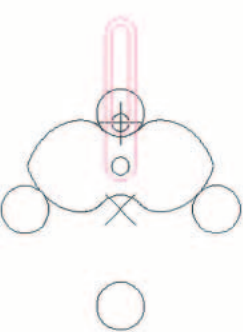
Full-turn cardioid indexer using two-tooth prolate epitrochoidal spur gearing elements of internal gear mesh type we have discussed in connection with Figure 1. The crank pin is fixed onto the roller follower wheel, with its center at a radius from the wheel center to satisfy both the prolate epitrochoid gear profile and the cardioid traced by the crank pin center, for a common center distance with the wheel, as a “congruity criterion” for proper design.
